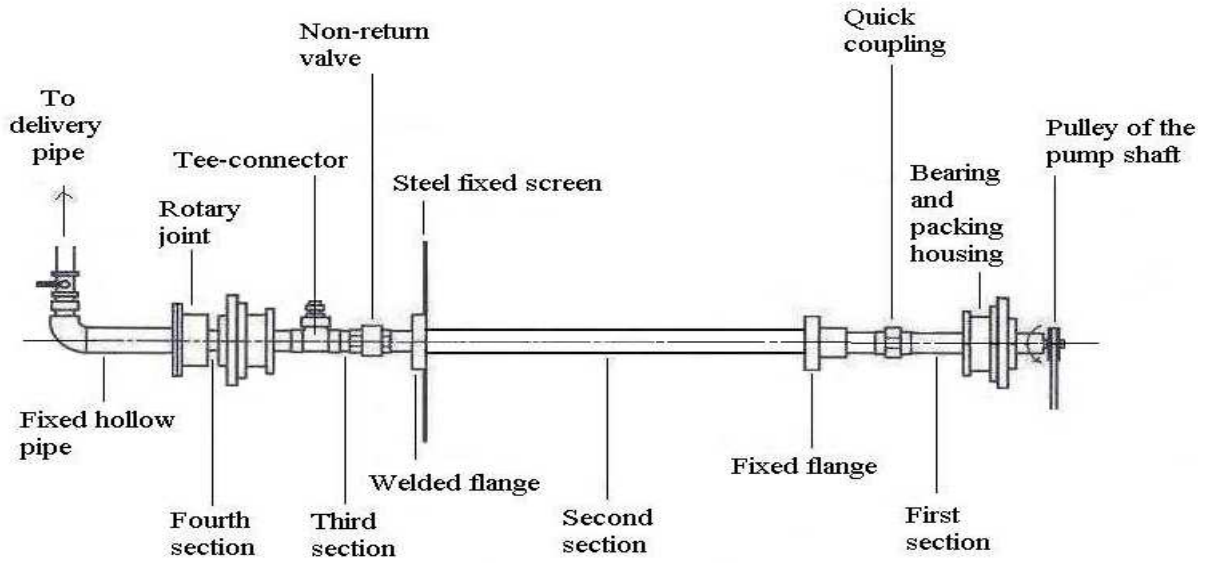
a Schematic drawing of the pump hollow shaft and its connections
